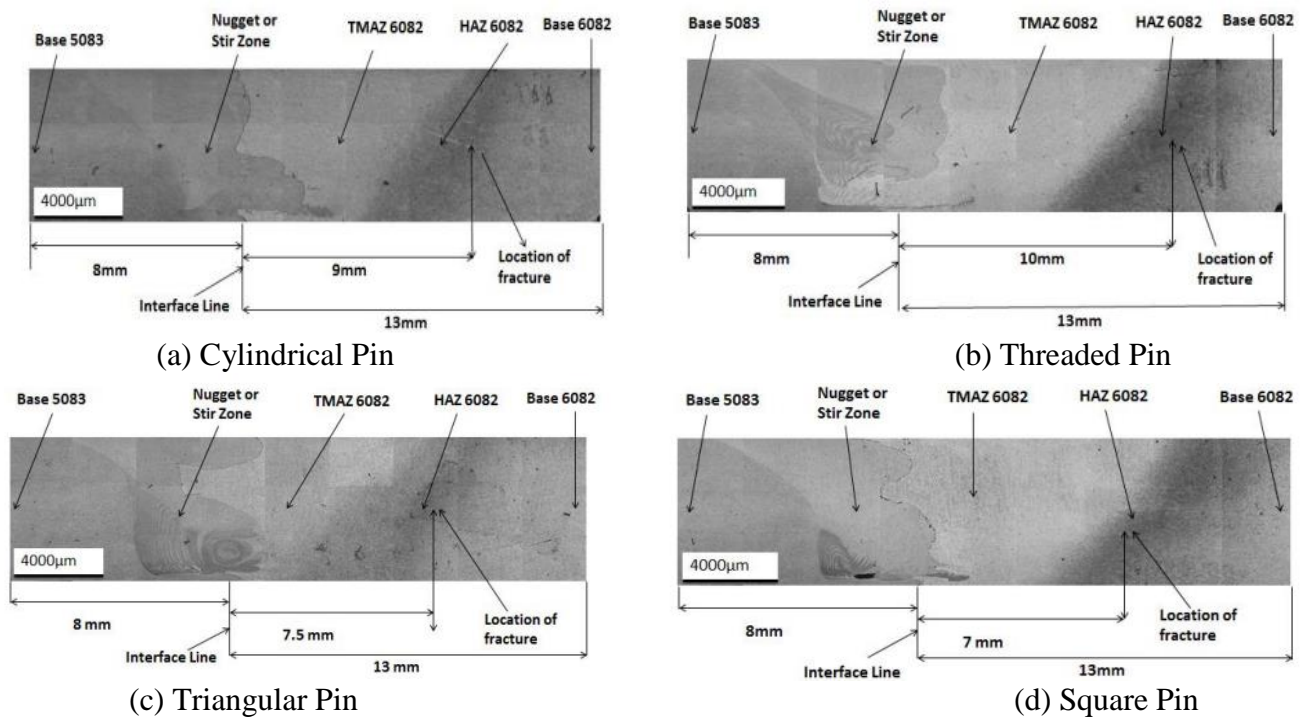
Optical images of welded samples with distinct regions with distance of fracture from interface line for (a) Cylindrical pin (b) Threaded pin (c) Triangular (d) Square.
